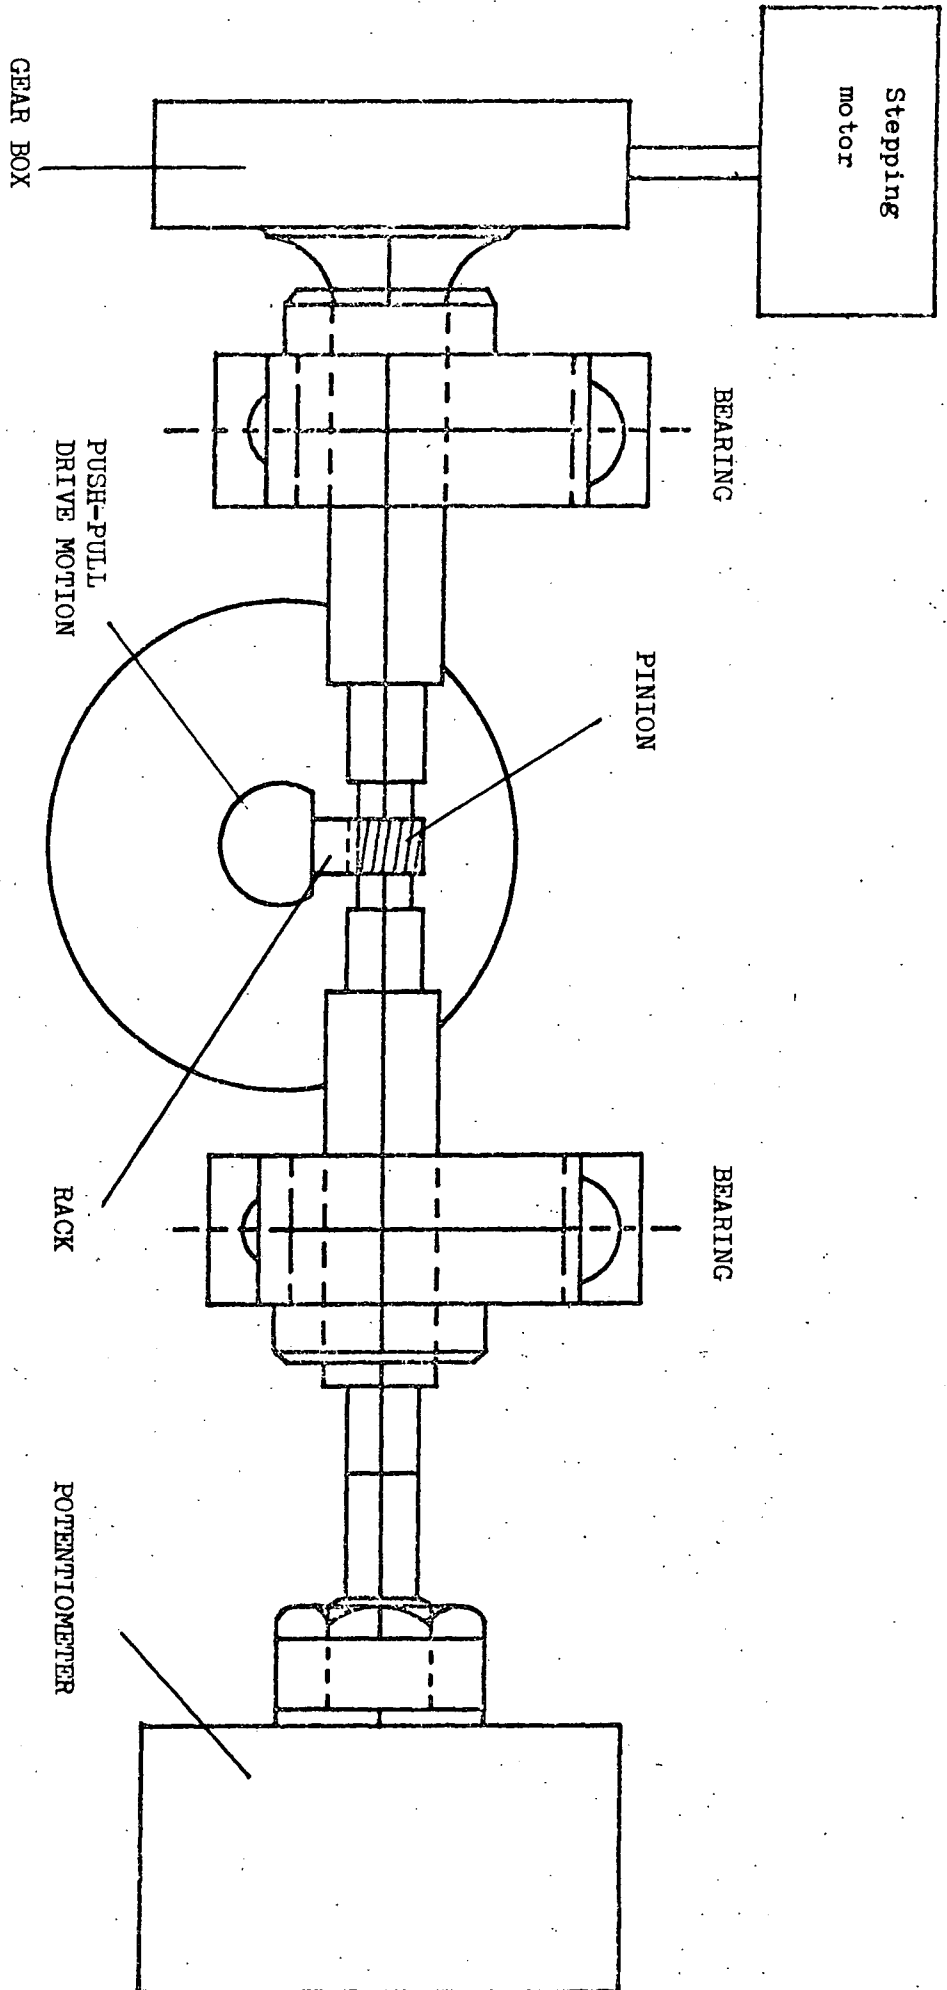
Horizontal section of upper pinion drive assembly.
